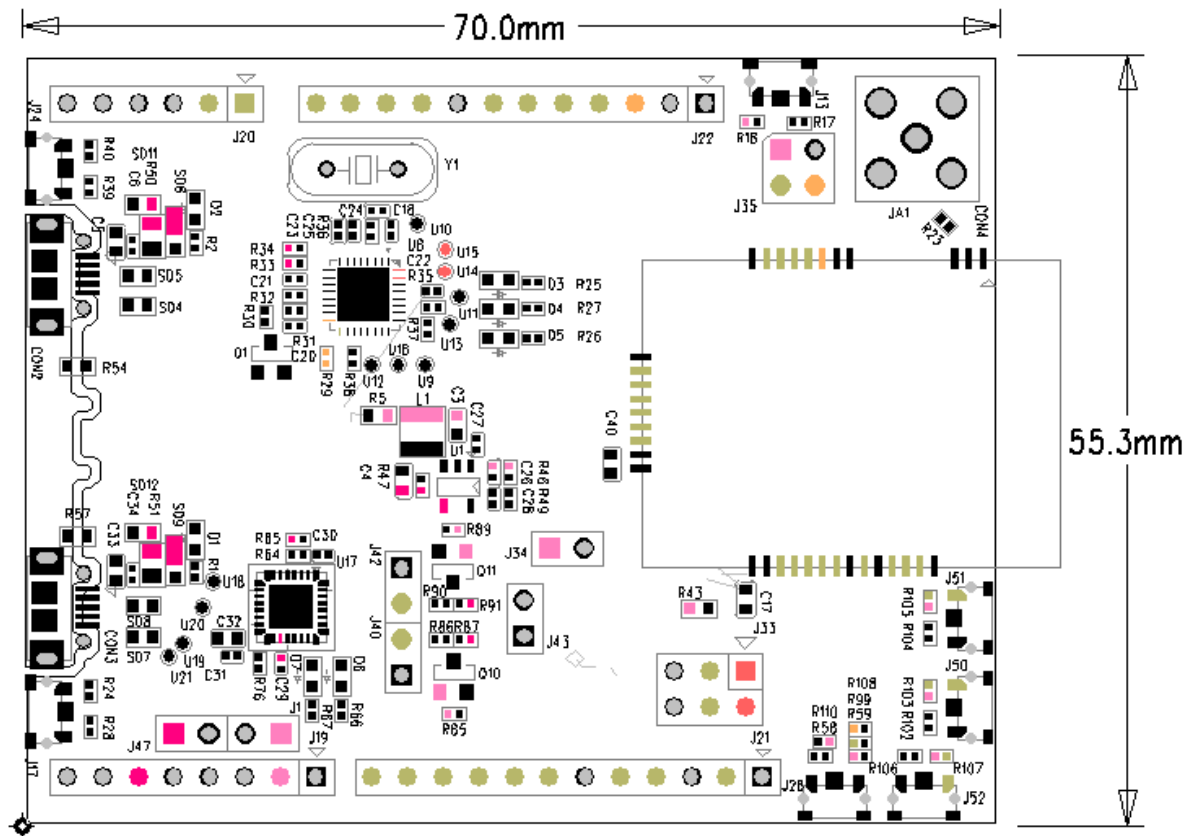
Ameba-ZII 2V0 Dev Board PCB Layout
